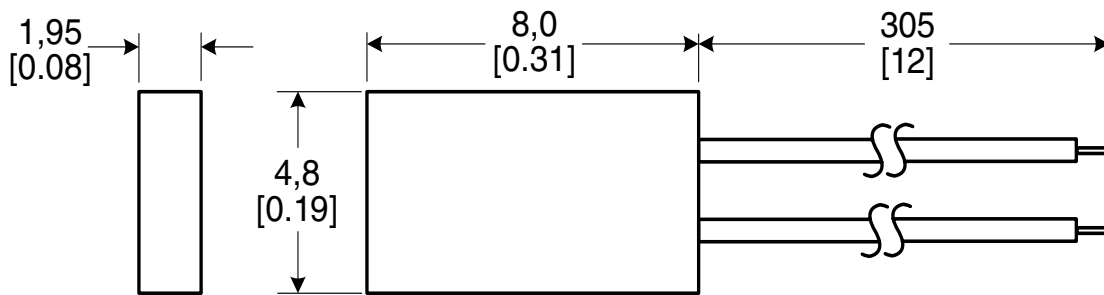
Mounting Dimensions (For reference only. mm/[in].)
